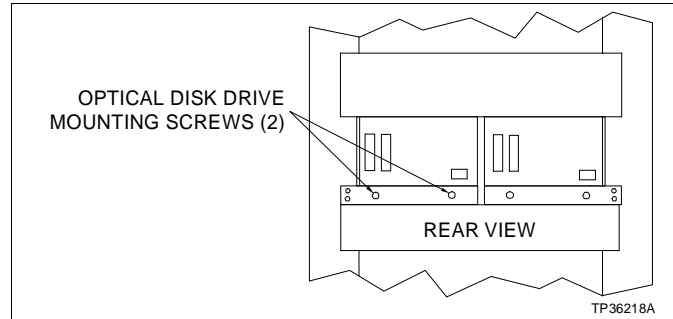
Driver Cabinet Optical Disk Drive Removal
